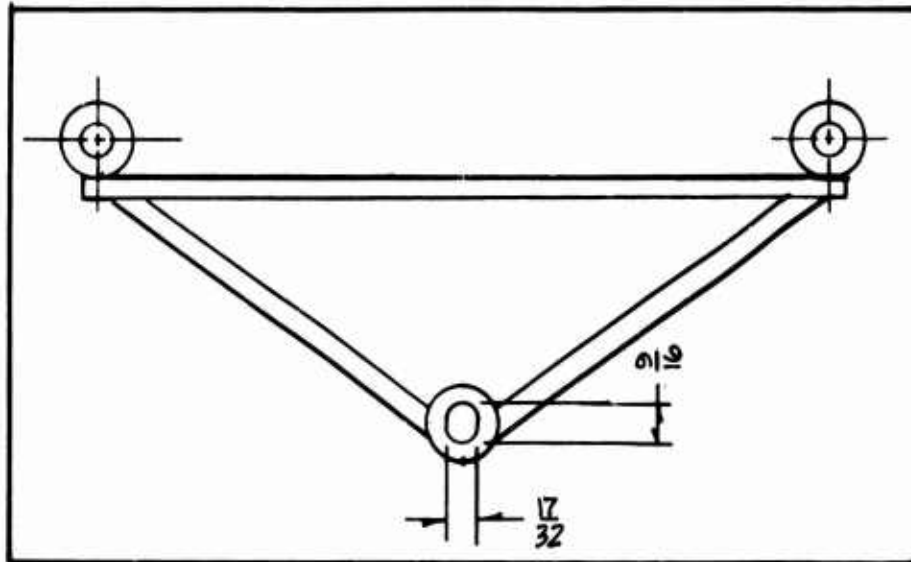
Triangular Hinge Adapter Showing Elongated Bolt Hole
